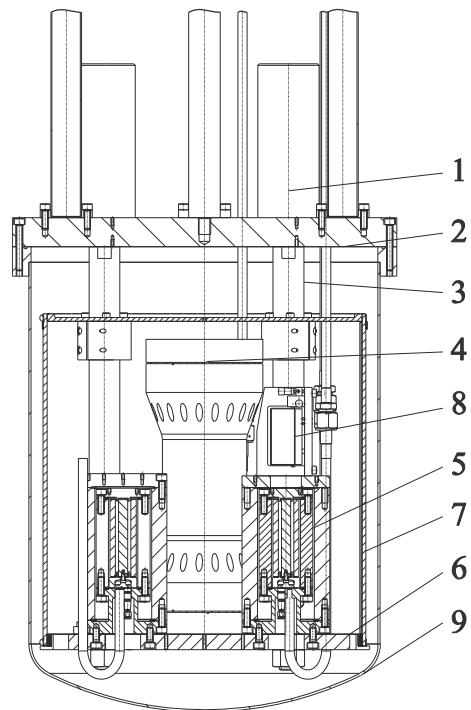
Design drawing of the measuring system located inside the vacuum can: Numbers 1–6 as in Fig. 1; 7 isothermal copper shield consisting of two parts; 8 mounting for a plane mirror interferometer; 9 vacuum can with its bottom sheet
